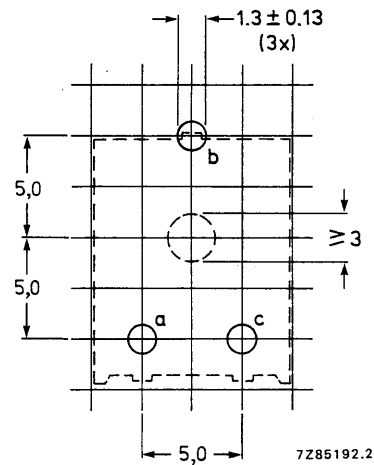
Hole pattern for horizontal versions, viewed from component side.
